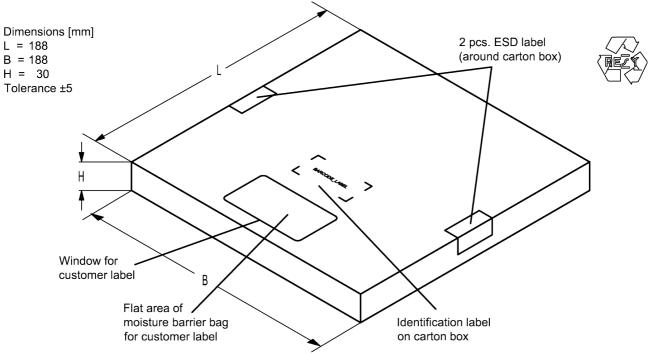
Drawing of folding box for reel with diameter of 180 mm.
